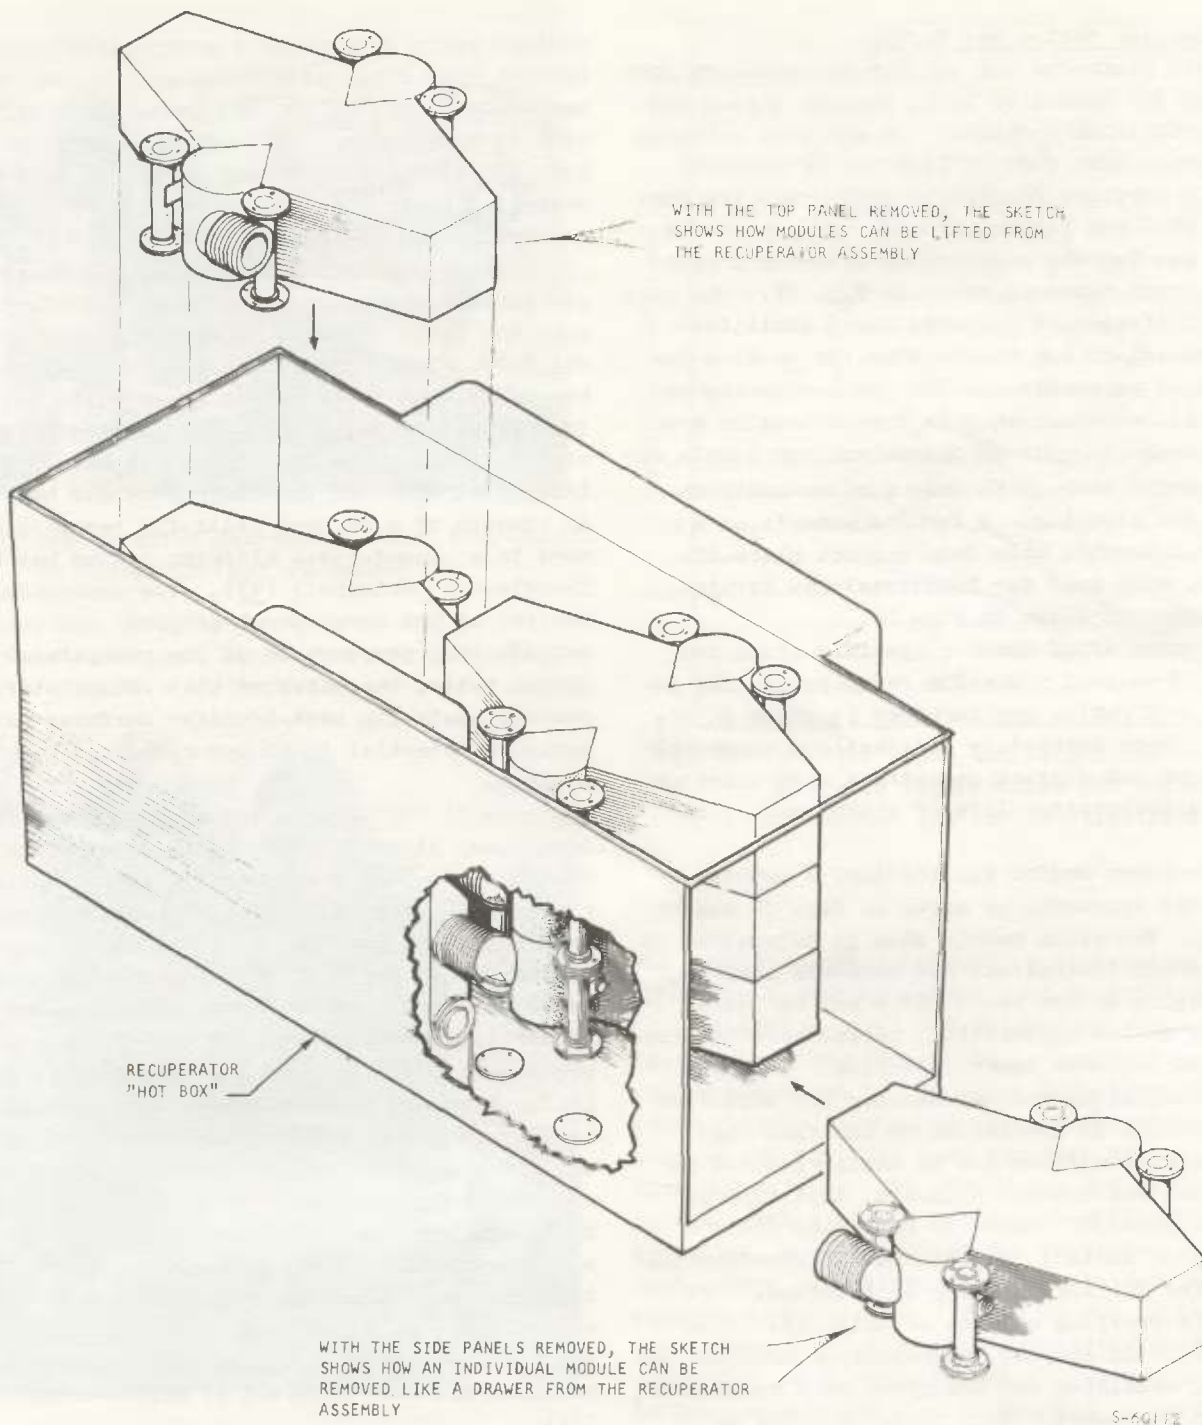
View showing a modular plate-fin recuperator assembly for large industrial and marine gas turbine application
